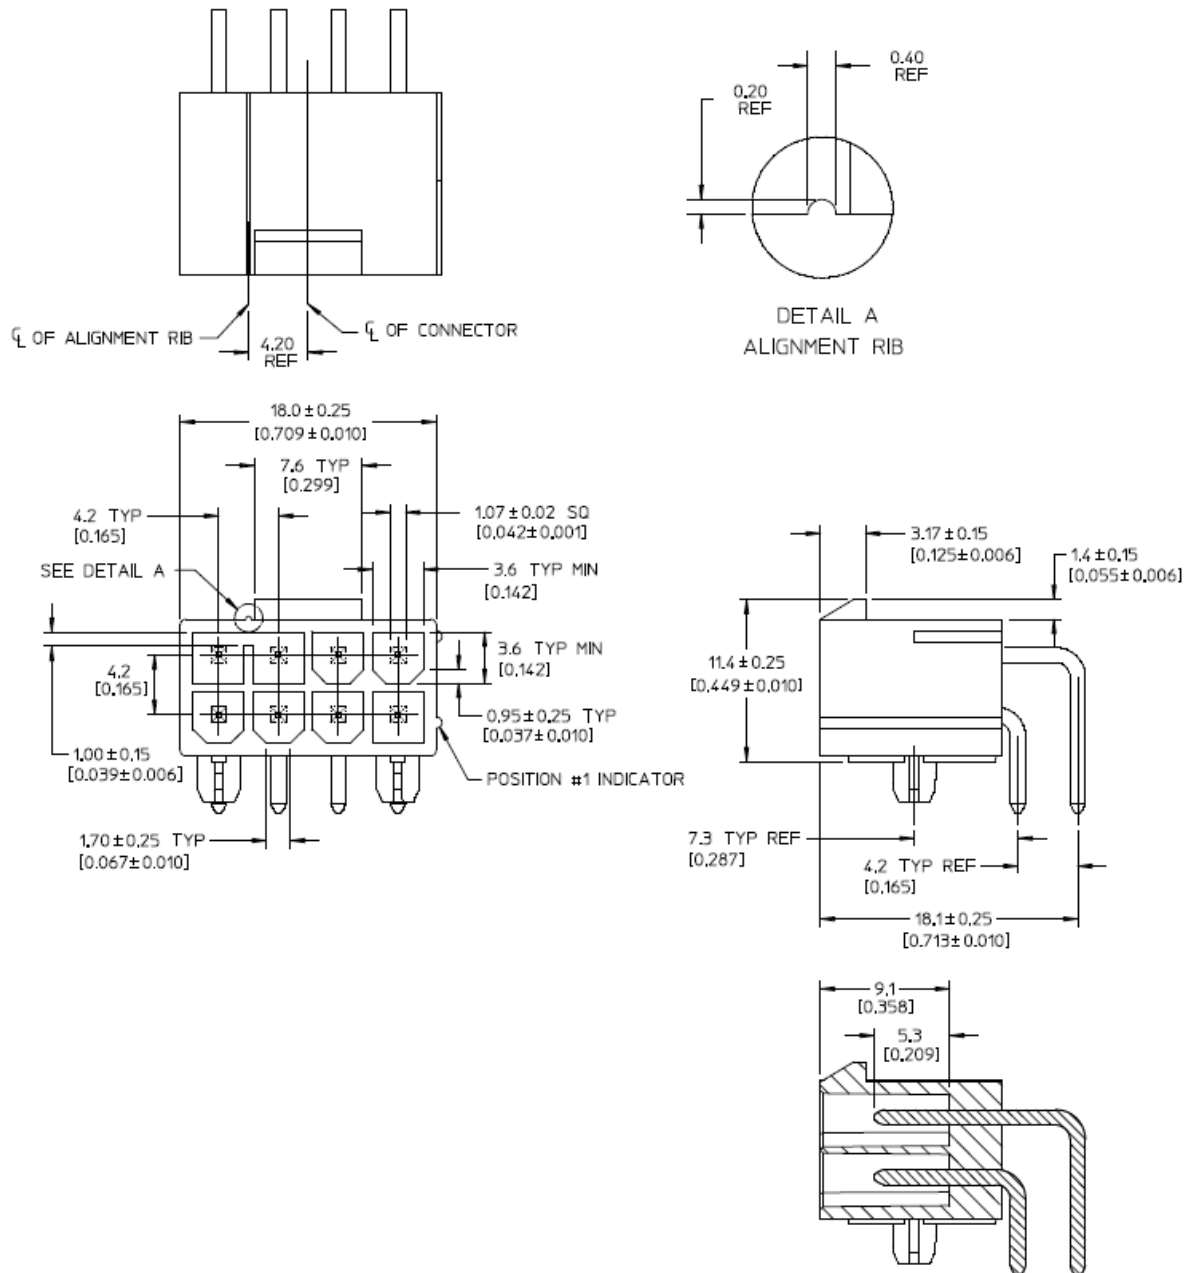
2 x 4 R/A Through-Hole Receptacle Drawing
